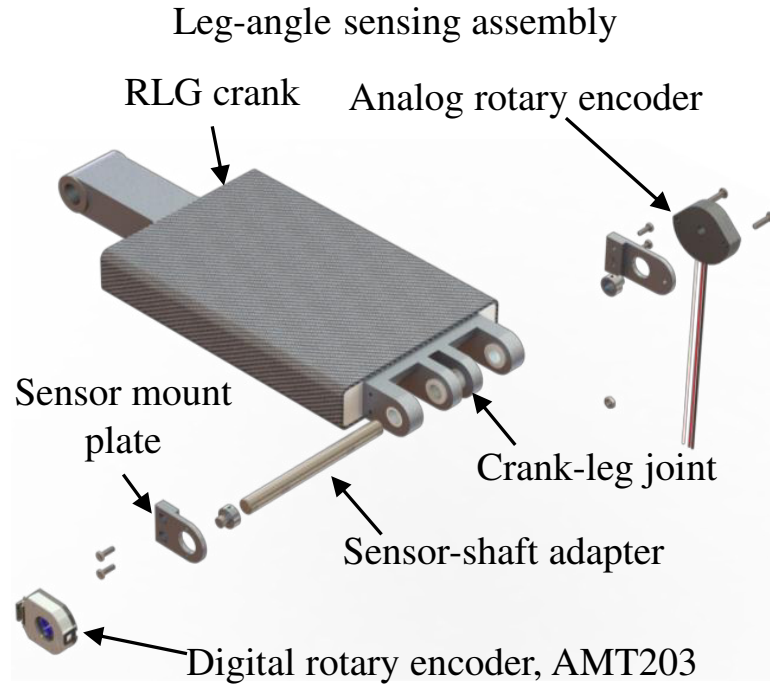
Exploded view of S-100 RLG sensor assemblies.
